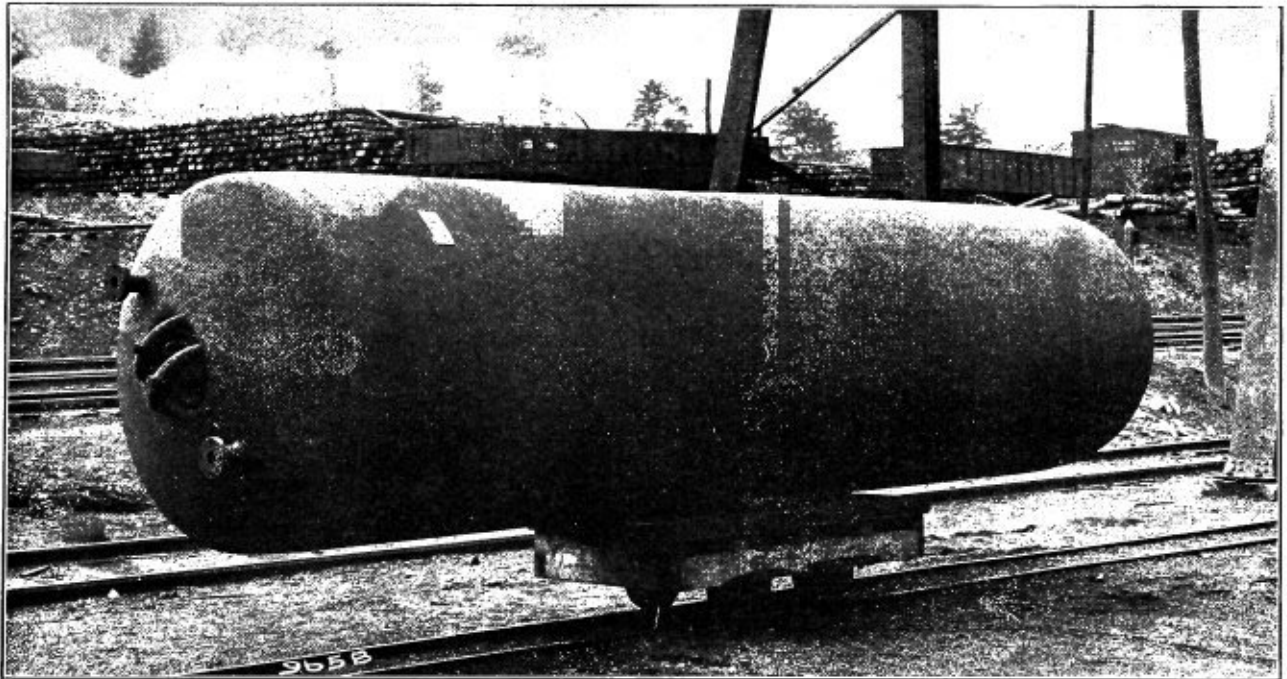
Seamless Lap Welded Tanks, 60 Inches in Diameter, Tested to 600 Pounds per Square-Inch Pressure
